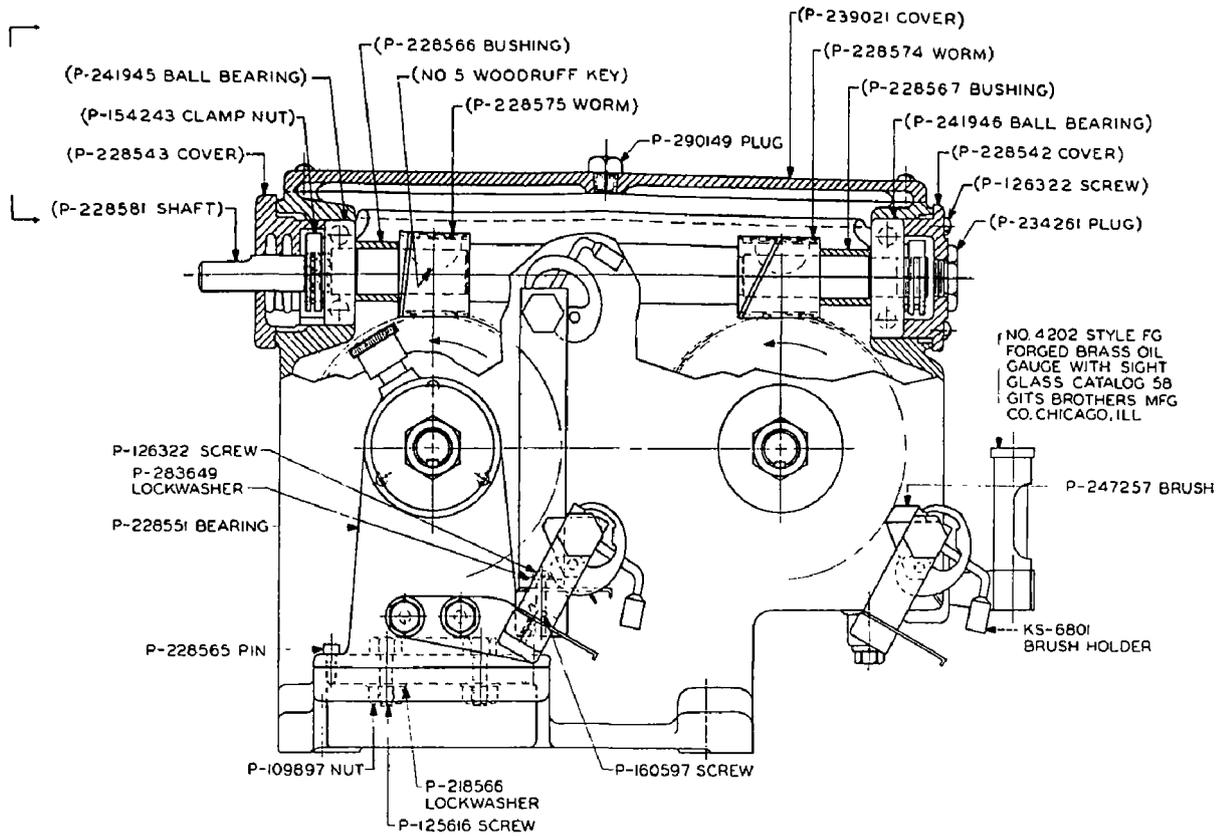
2C, 2D, and 2E Interrupter Mounting—Side View (For Top View See Fig. 9)
